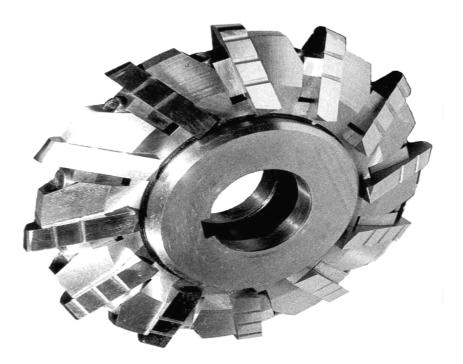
Specimen of the disc cutter prefabricated module m = 20 mm.
